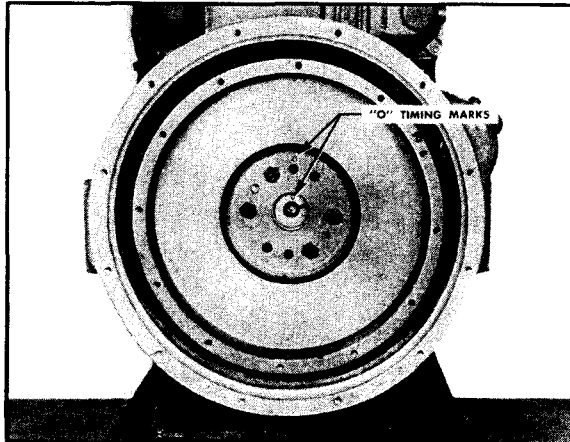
"O" marks on flywheel and crankshaft flange
